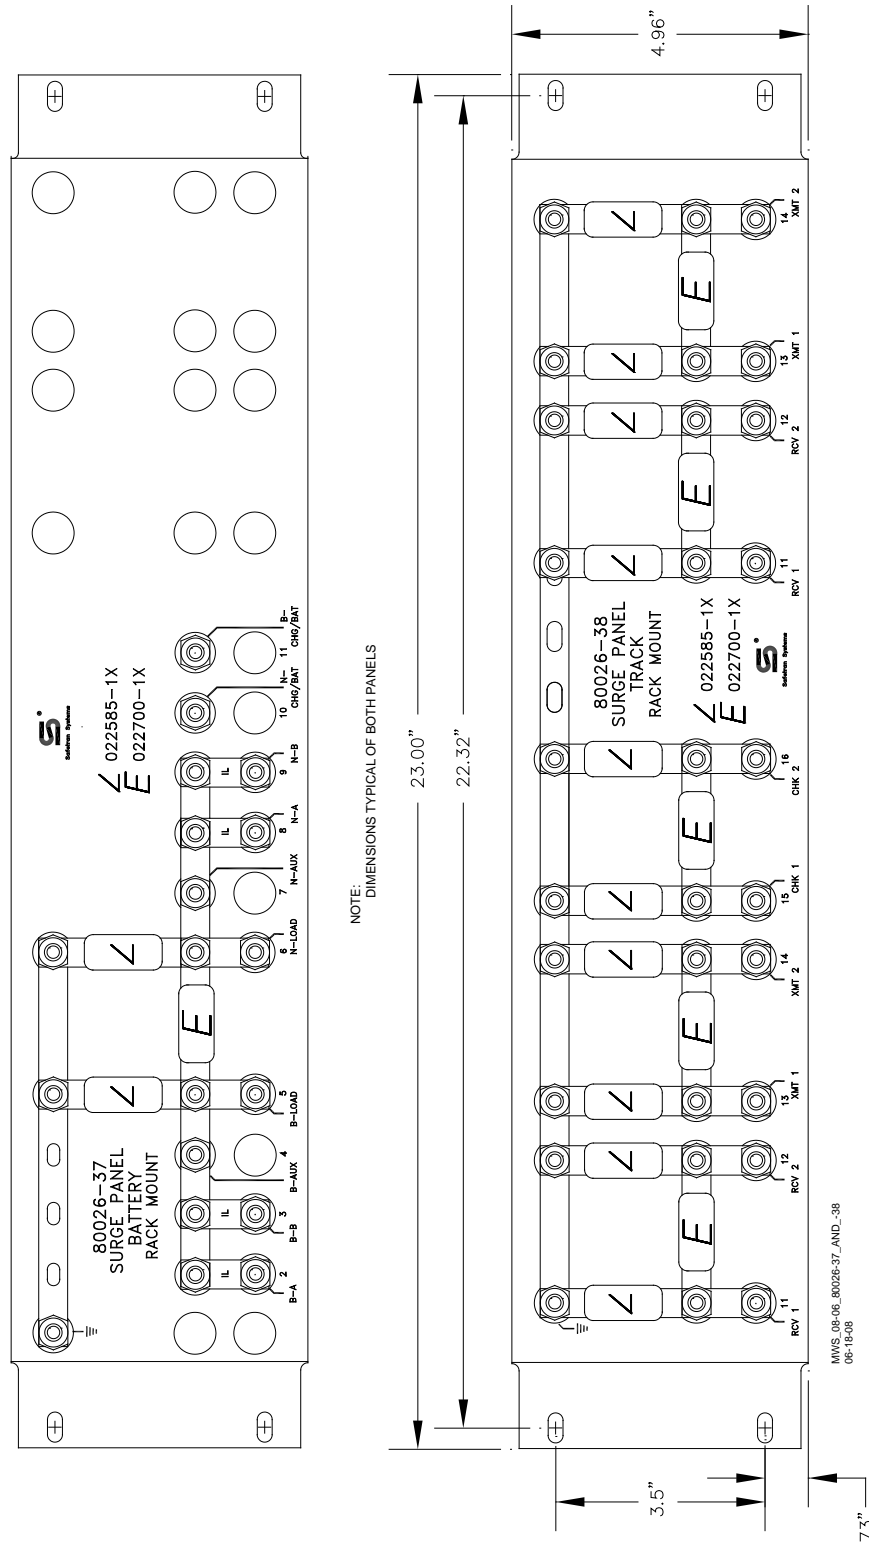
Rack Mounted Surge Panels, 80026-37 And -38
